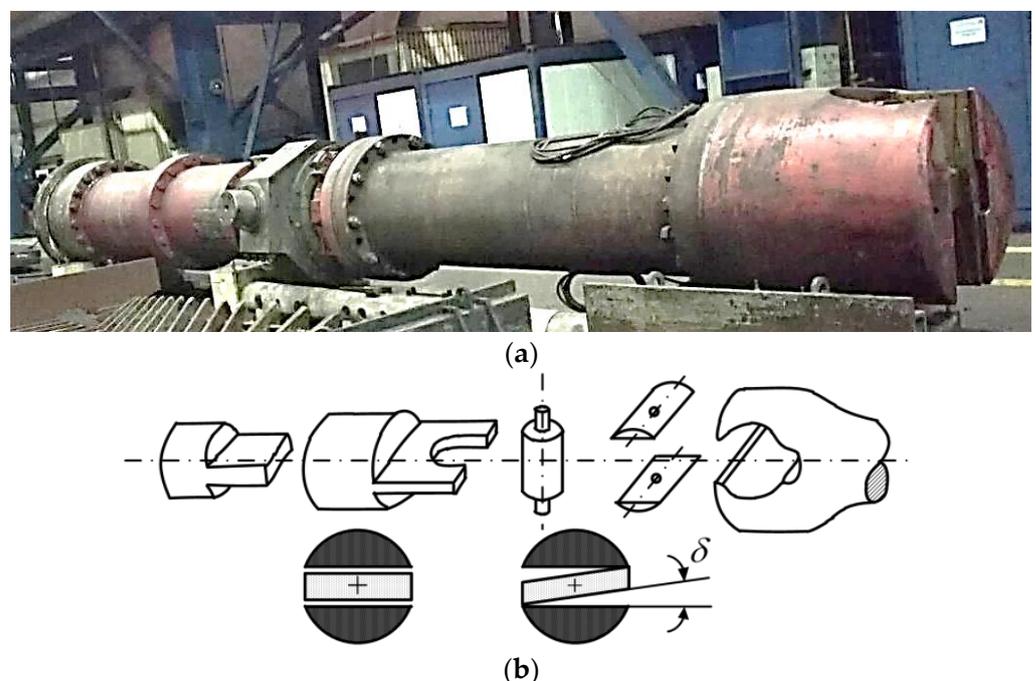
The spindle photo (a) and the image of the spindle joint parts (b).
